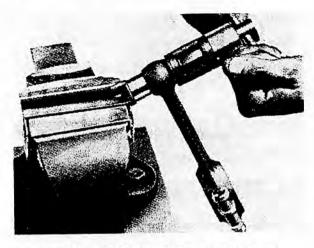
RENEWING GUDGEON PIN BUSH. SERVICE TOOL MF6201 WITH ADAPTORS
